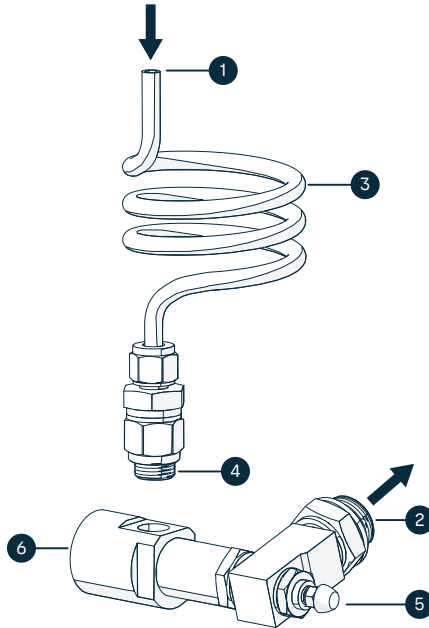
Alternative assembly of DSC74C for tight spaces, with DMCOIL used for cooling the sample
